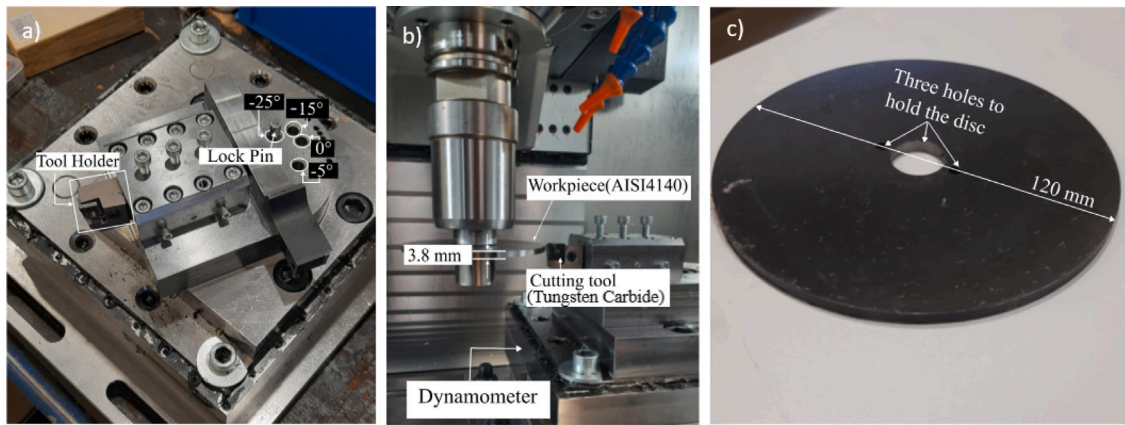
Experimental setup (a) Cutting tool setup (b) Closeup of experimental configuration (c) Workpiece sample.
